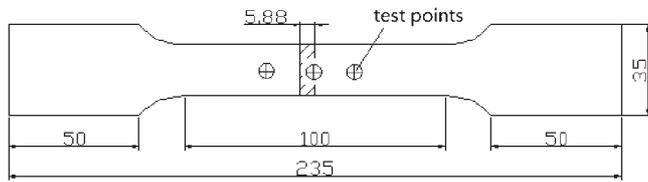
The shape and dimensions of specimens (Unit: mm).
